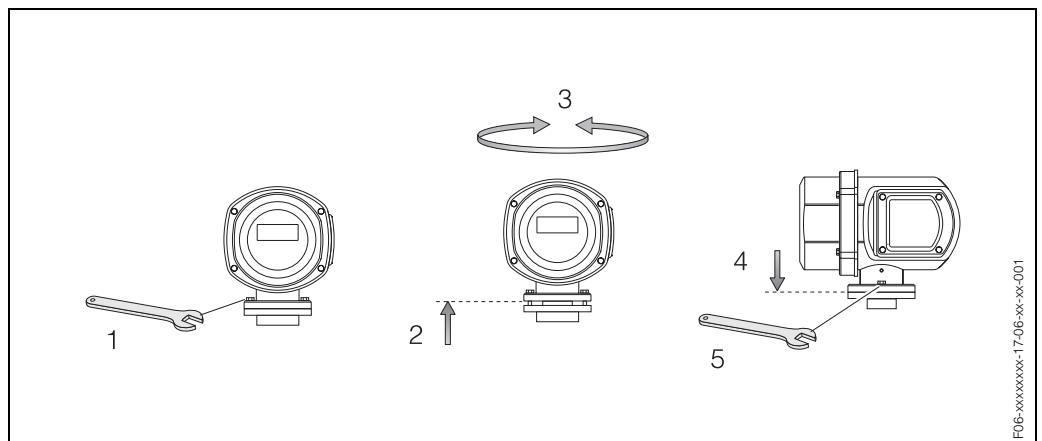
Turning the transmitter housing (stainless-steel field housing)
